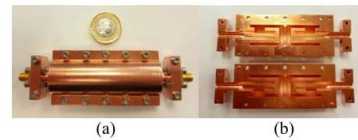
Photograph of the fabricated S-band coaxial cavity resonator filter after being copper plated. (a) Fabricated filter with both sides fixed together using nuts and bolts. (b) Left and right side of the fabricated filter.
